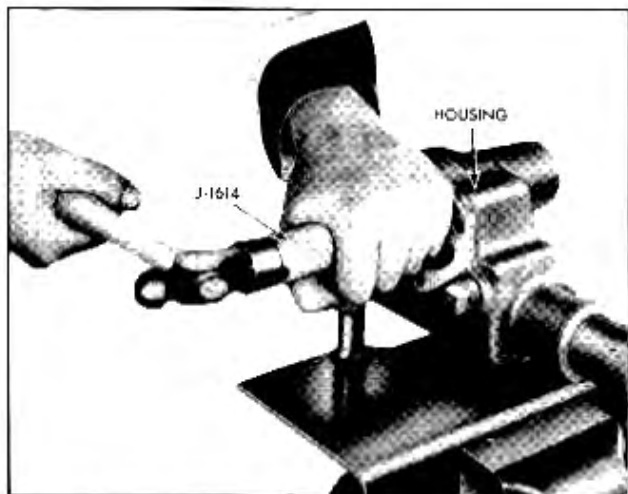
Removing or Replacing Pitman Shaft Bushing
